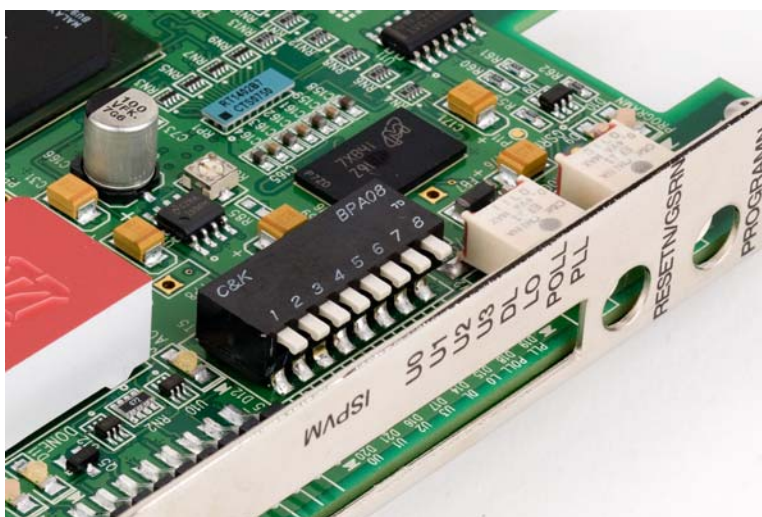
8-position DIP Switch (SW5) on Secondary PCB Side
